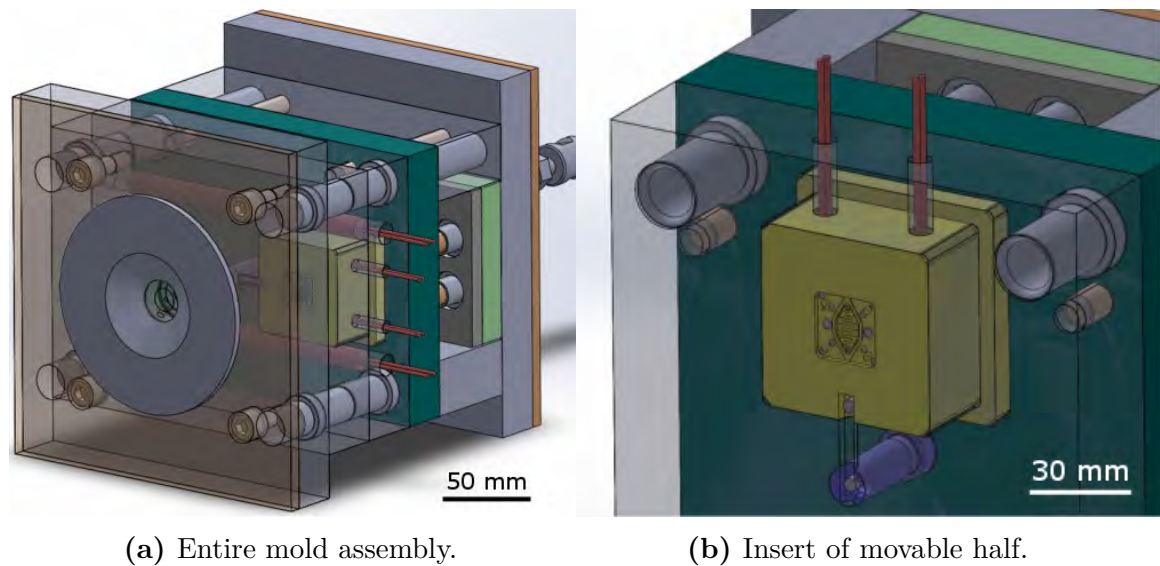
CAD models of the initial mold concept with plugged insert (highlighted in yellow) clamped from the back by the back-up plate. The heating was supposed to be fully electrical. The film gate is not shown at the insert.
